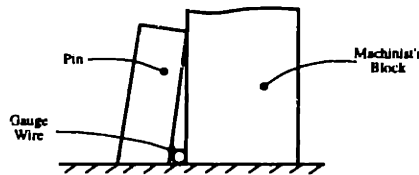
Measuring tilt of drill tooling pins with a machinists square.
